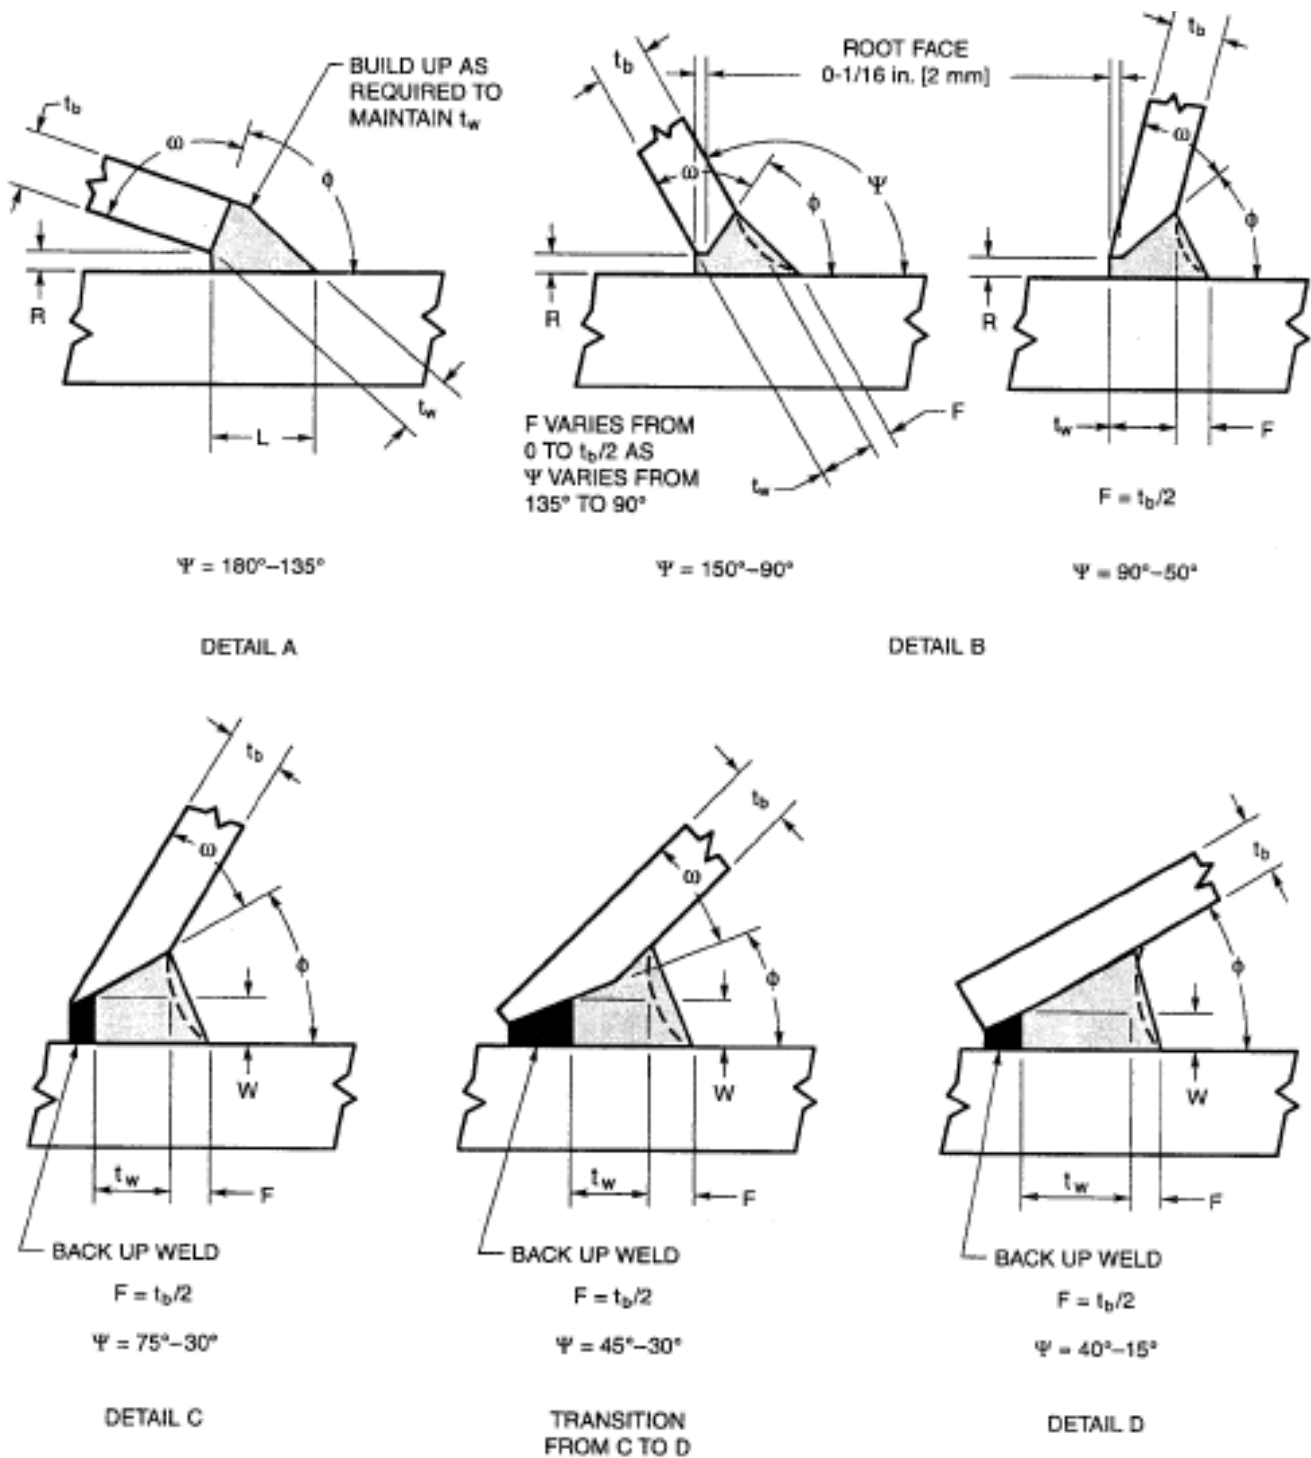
of AWS D1.1 — Prequalified joint details for CJP groove welds in tubular T, Y, and K-connections — Standard flat profiles for limited thickness.
